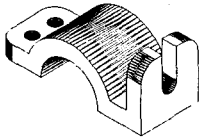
3D solid model of mounting bracket using automatic geometry design program
